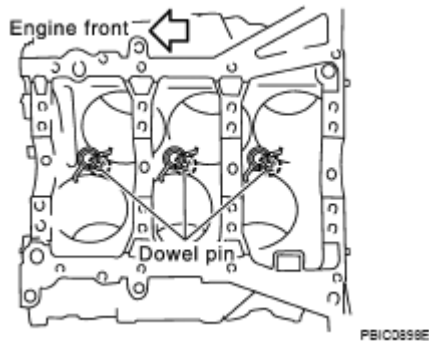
Inserting Oil Jet Dowel Pin And Cylinder Block Dowel Pin Hole
